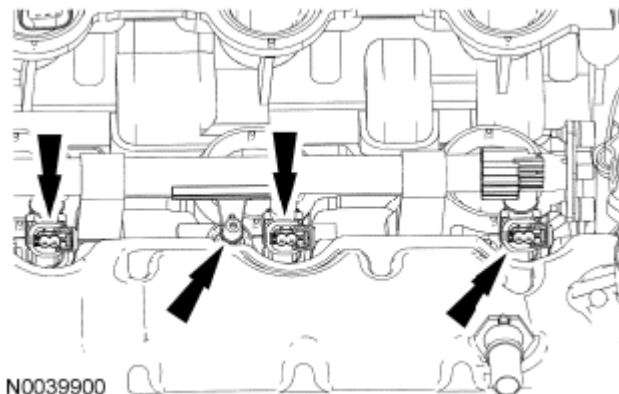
Locating Fuel Injector Electrical Connectors And Wiring Harness Retainers
